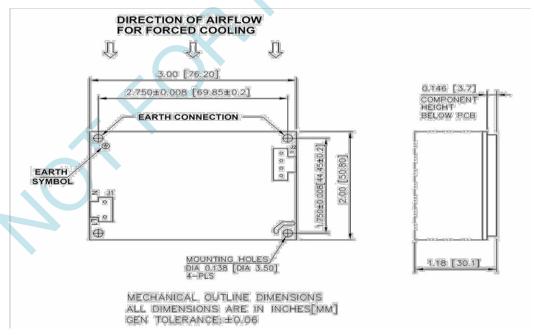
Mechanical Drawing - Molex Header (Option 2)
